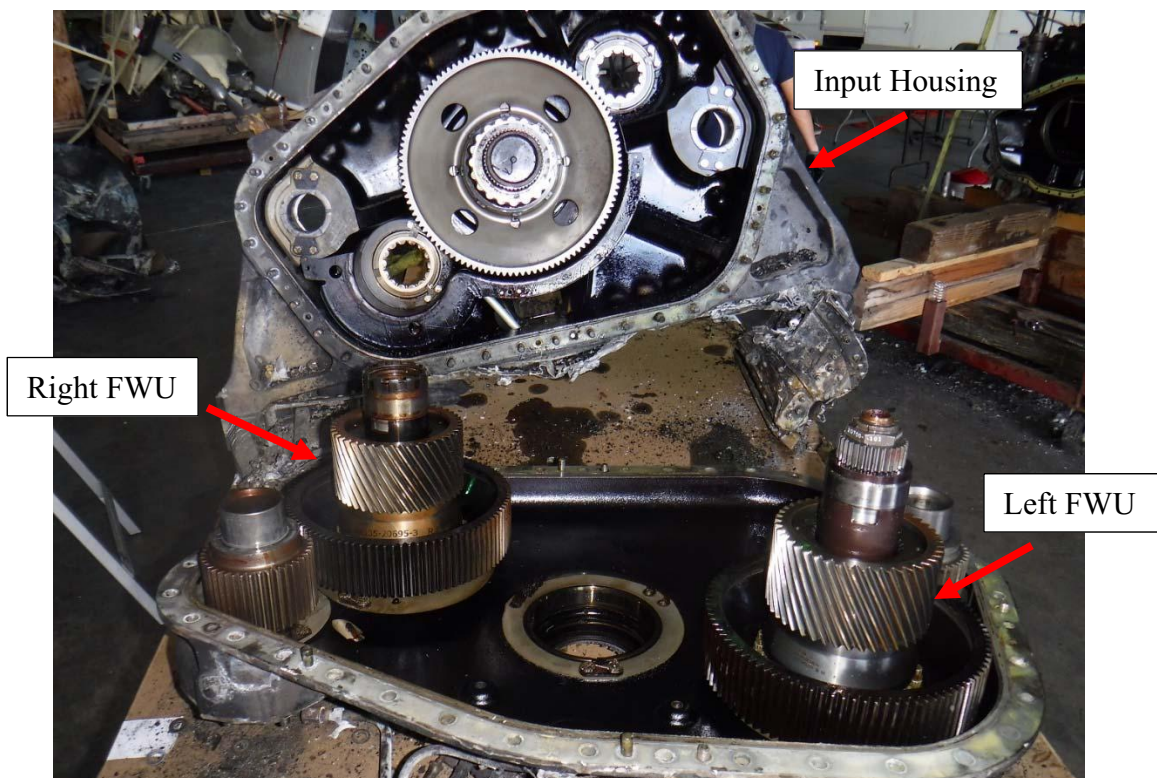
FWU exposed after removal of the front cover from the input housing. (Photo courtesy of Sikorsky)
